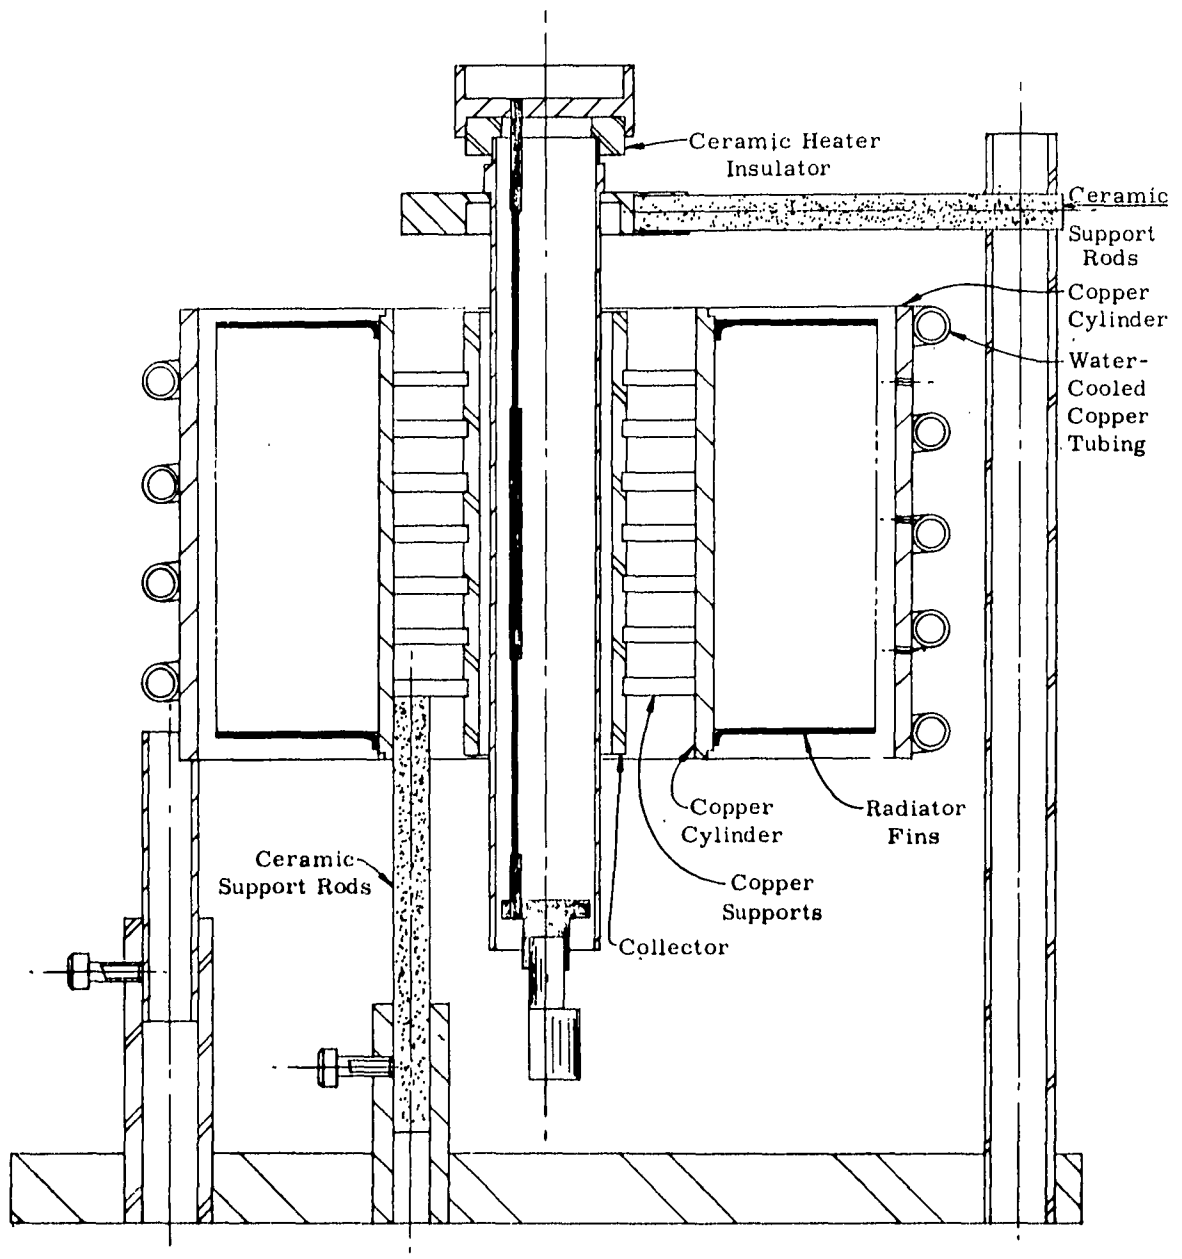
FIN-RADIATOR TEST FIXTURE
